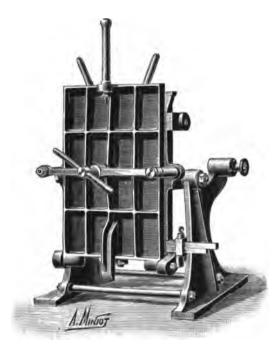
Casting-press for flat stereotype-plates: closed, and turned to the vertical or casting position.
